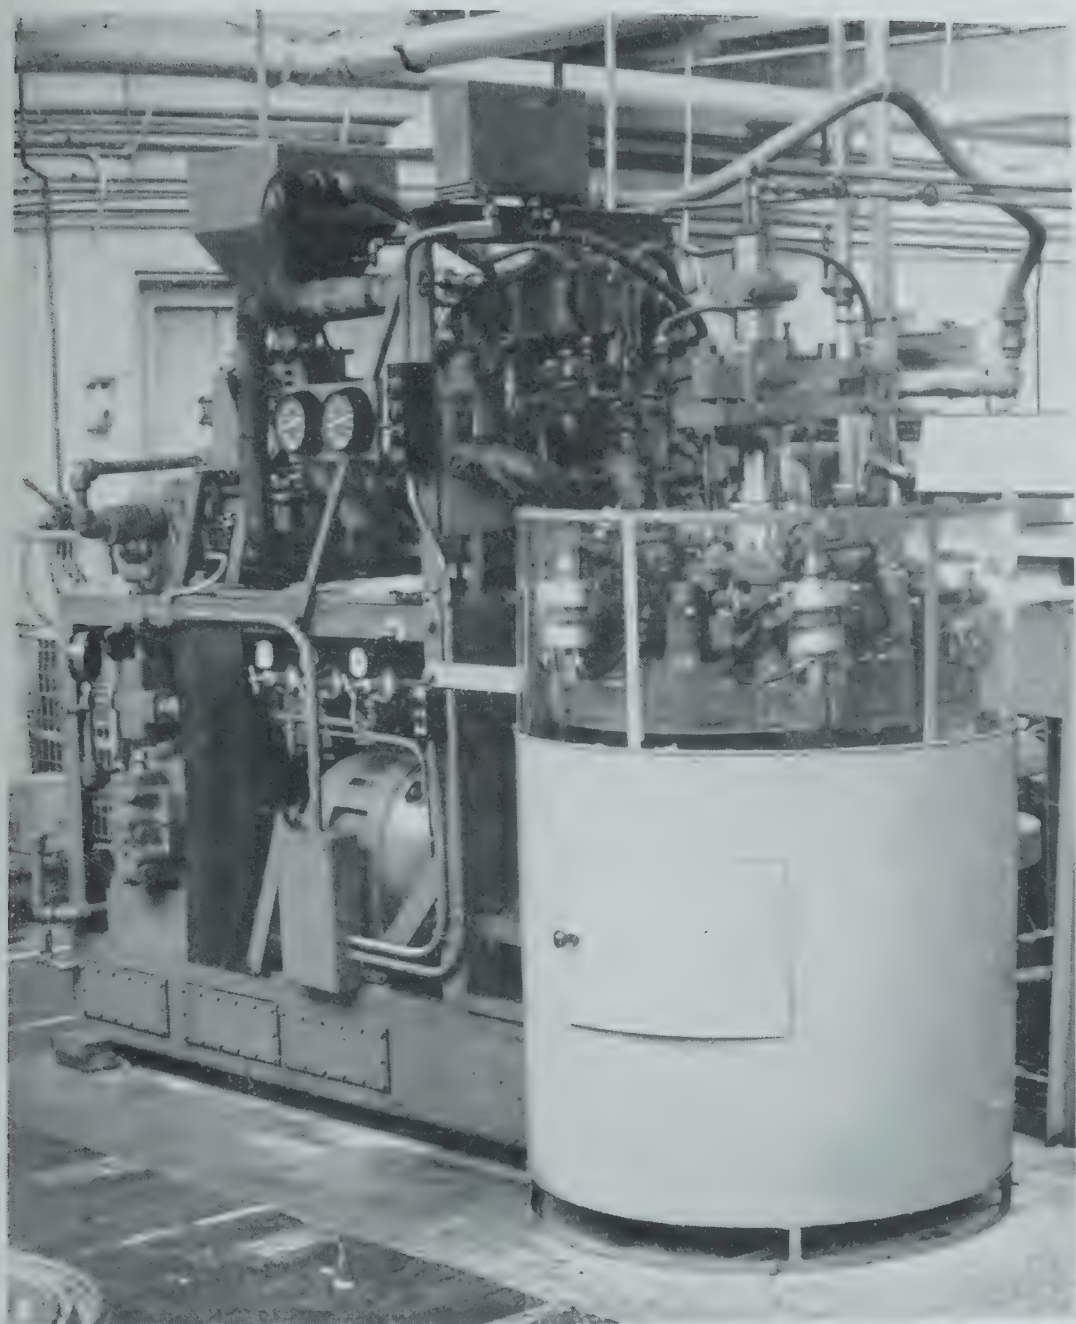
General view of extrusion-blowing machine with single nozzle feeding several moulds on rotary table (Courtesy Cascelloid Division of British Xylonite Co. Ltd.)
